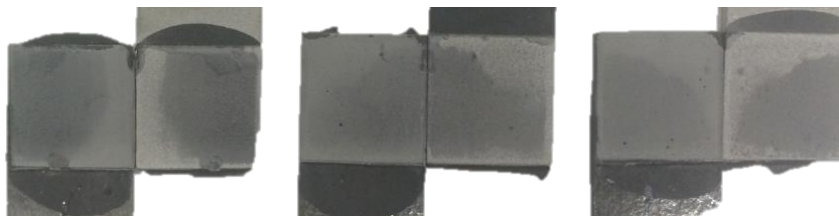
Failure modes of CFRP (2.1 mm)/HSS (2 mm) 25 mm overlap SLJs tested specimens
